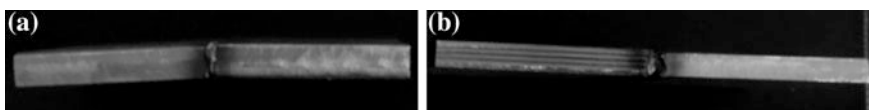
a Side view of welding sample without chamfered edge exhibiting the angular distortion. b Side view of welding sample with chamfered edge exhibiting reduced angular distortion
